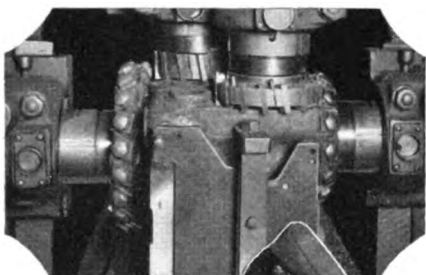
Snagging Operation—Cleaning Exhaust Manifold Castings for Type AB Mack Motors
